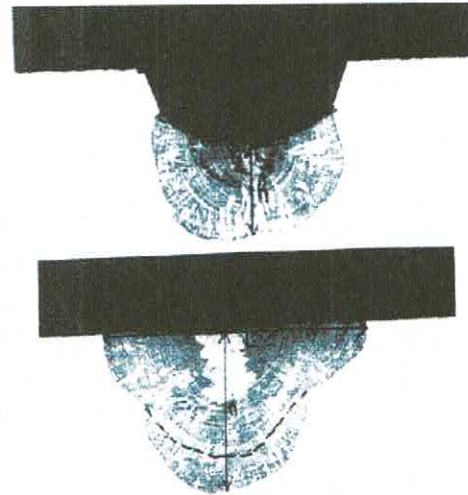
Macrographs of the 1st pass ($h = 2.7 \text{ mm}$, 17.5 mm^2) and 2nd pass ($h = 5.9 \text{ mm}$, total welded zone 38.5 mm^2) [1]
